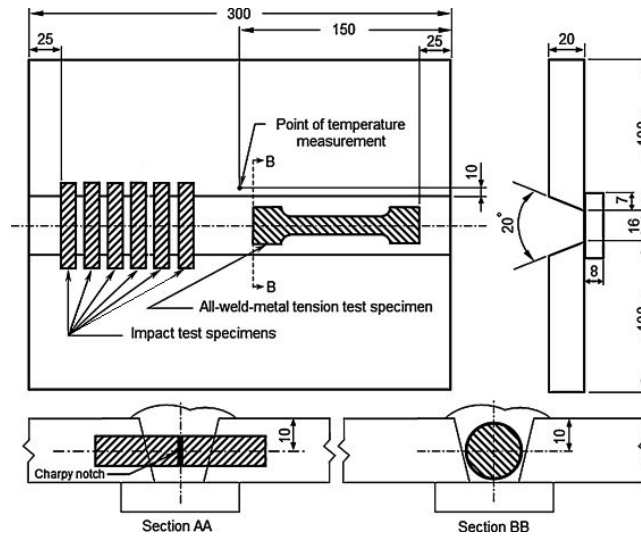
Schematically representation of prepared all-weld-test assembly [24]
